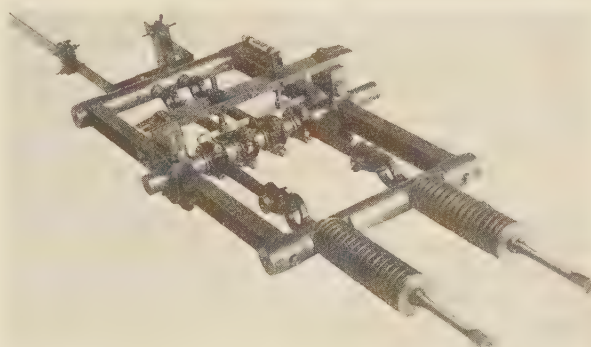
FOUR-BEARING FRICTION MACHINE, ESSENTIAL PARTS
